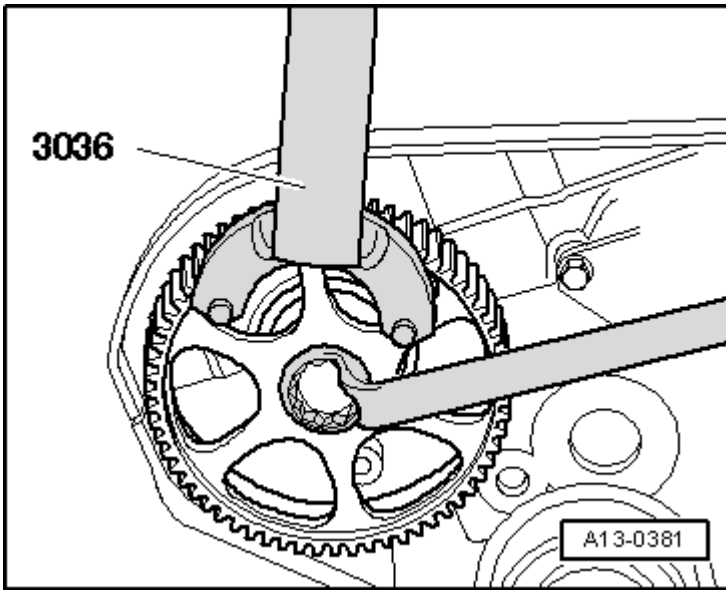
Identifying Use Of Counterhold On Camshaft Gear Using 3036 Retainer
